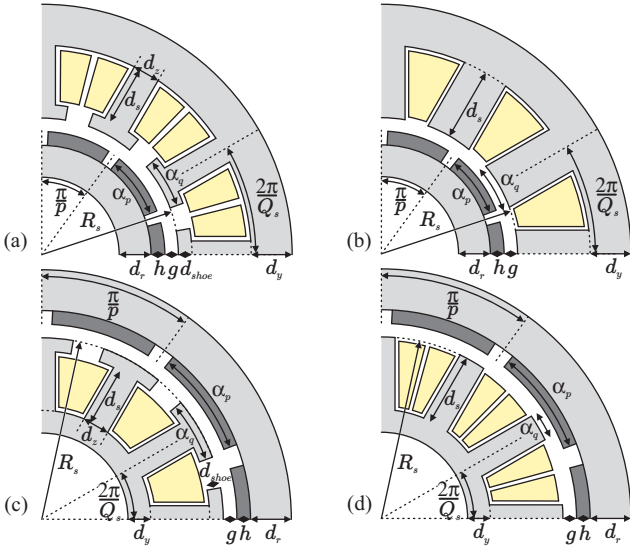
Geometrical models of the considered radial flux machines, (a) with internal rotor and double layer concentrated windings and stator with tooth-tips, (b) with internal rotor and single layer concentrated windings and stator without tooth-tips, (c) with external rotor and single layer concentrated windings and stator with tooth-tips, (d) with external rotor and double layer concentrated windings and stator without tooth-tips.
